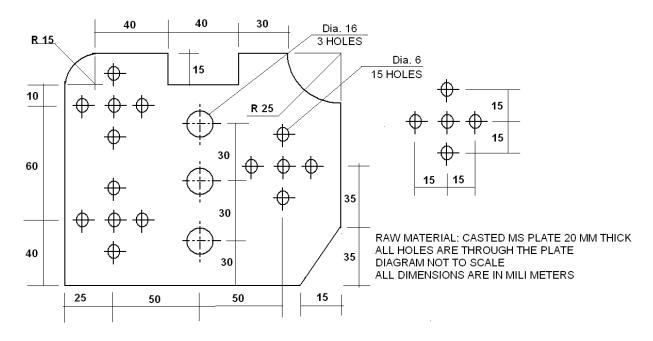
A component to machined on a vertical machining center (VMC)
